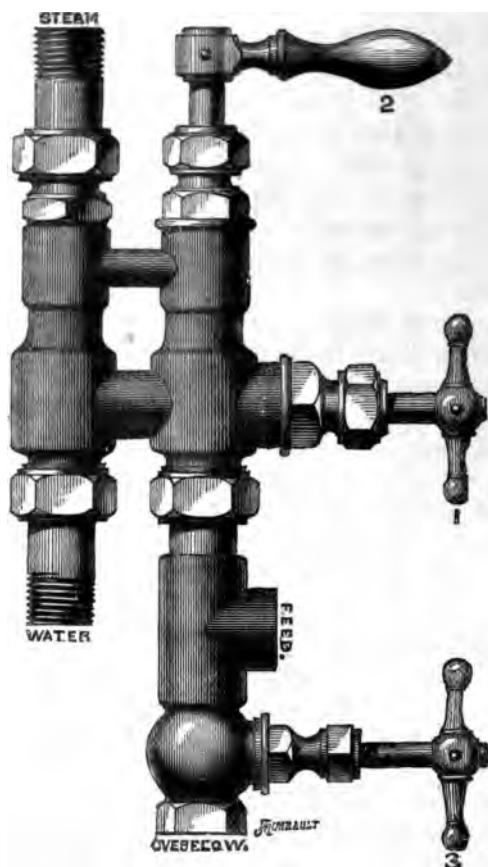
Hancock Inspirator. Stationary Boilers.
